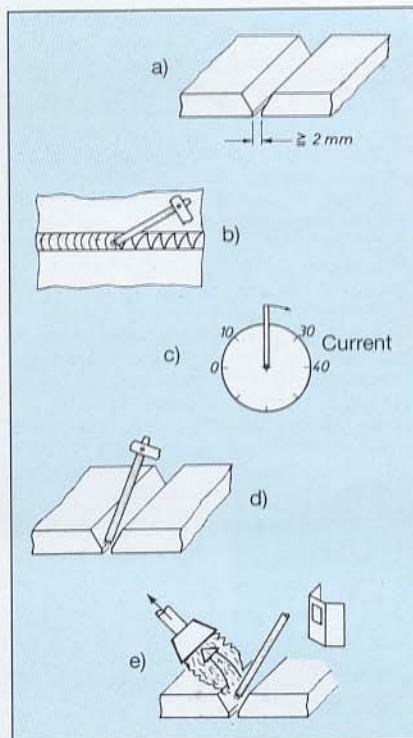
Essential information for welding hot dip galvanized steel.
